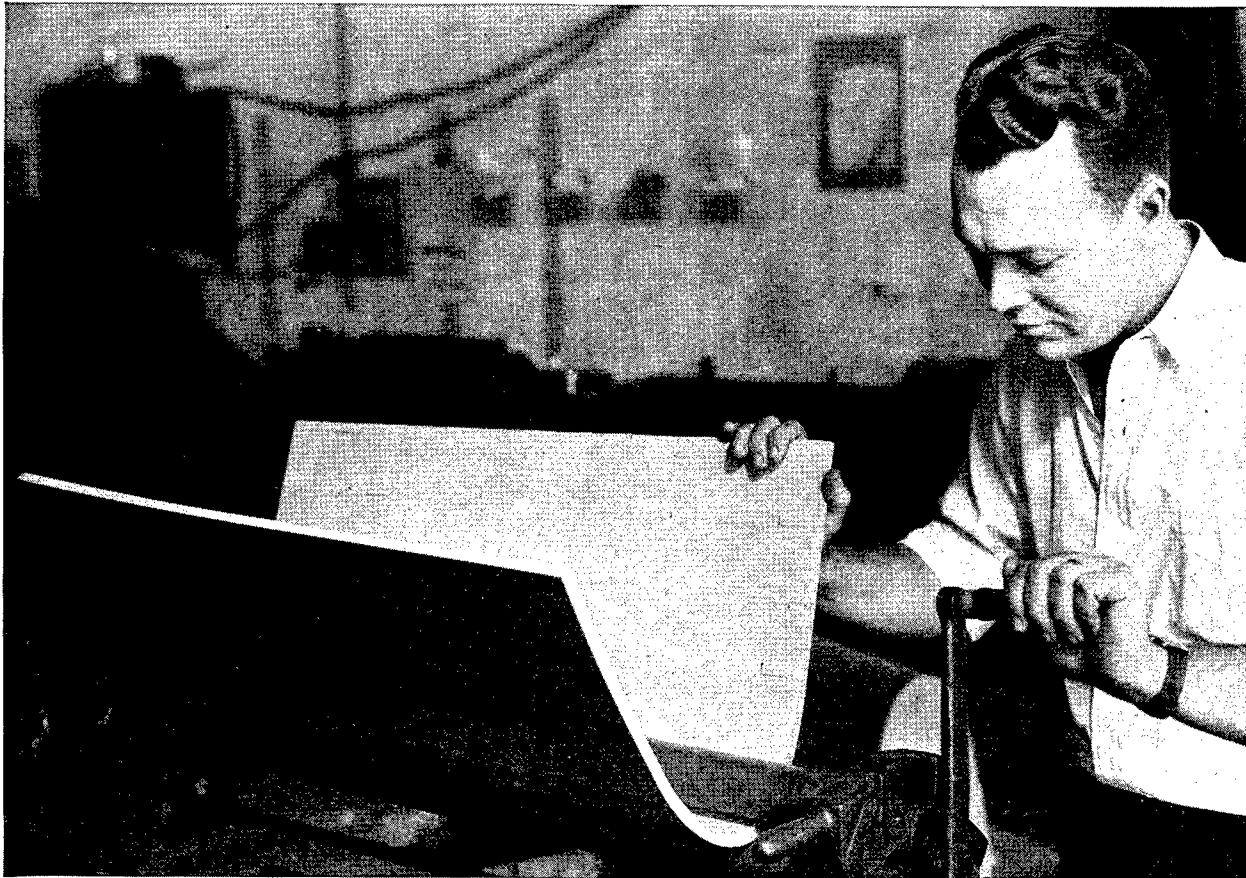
End-grain balsa core, bonded to one aluminum face, being bent on a conventional hand-operated sheet-metal rolling machine.
